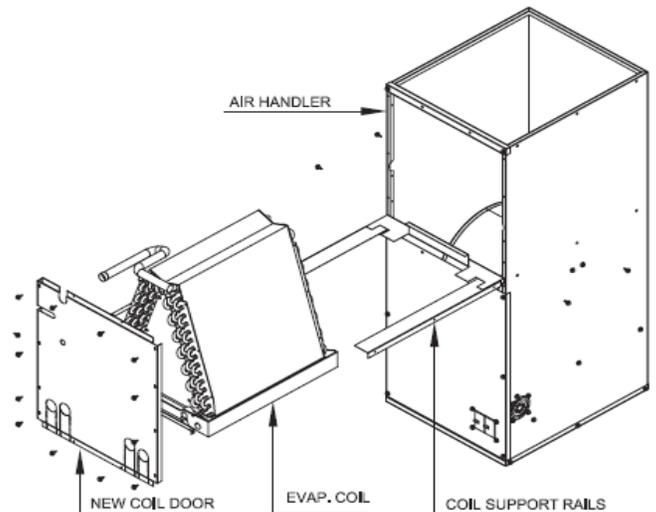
Evaporator Coil Assembly Converting to downflow operation.
